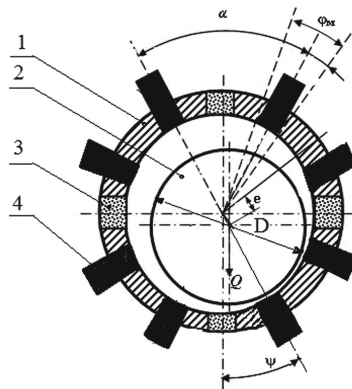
Gas-magnetic bearing: 1 is bearing box, 2 is rotor, 3 is porous insert, 4 is magnetic circuit.
